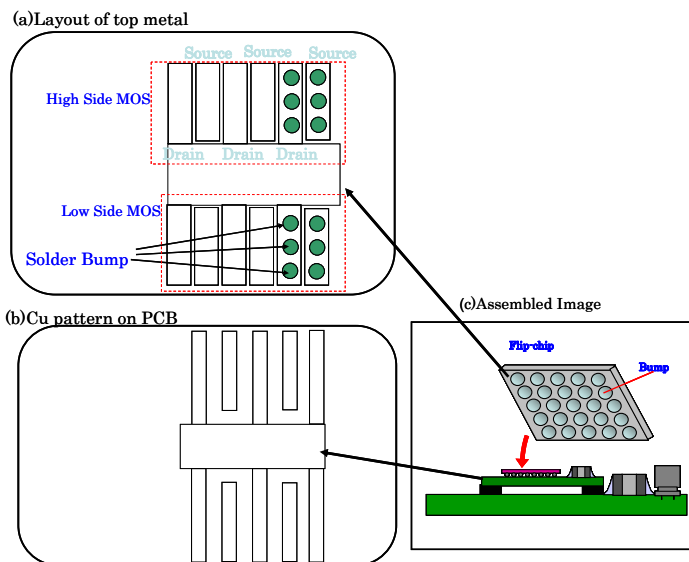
Assembled image, layout of top metal in IC and Cu pattern on printed circuit board (PCB). The drain and the source bumps are electrically connected by parallel running thick Cu metals in the PCB.
